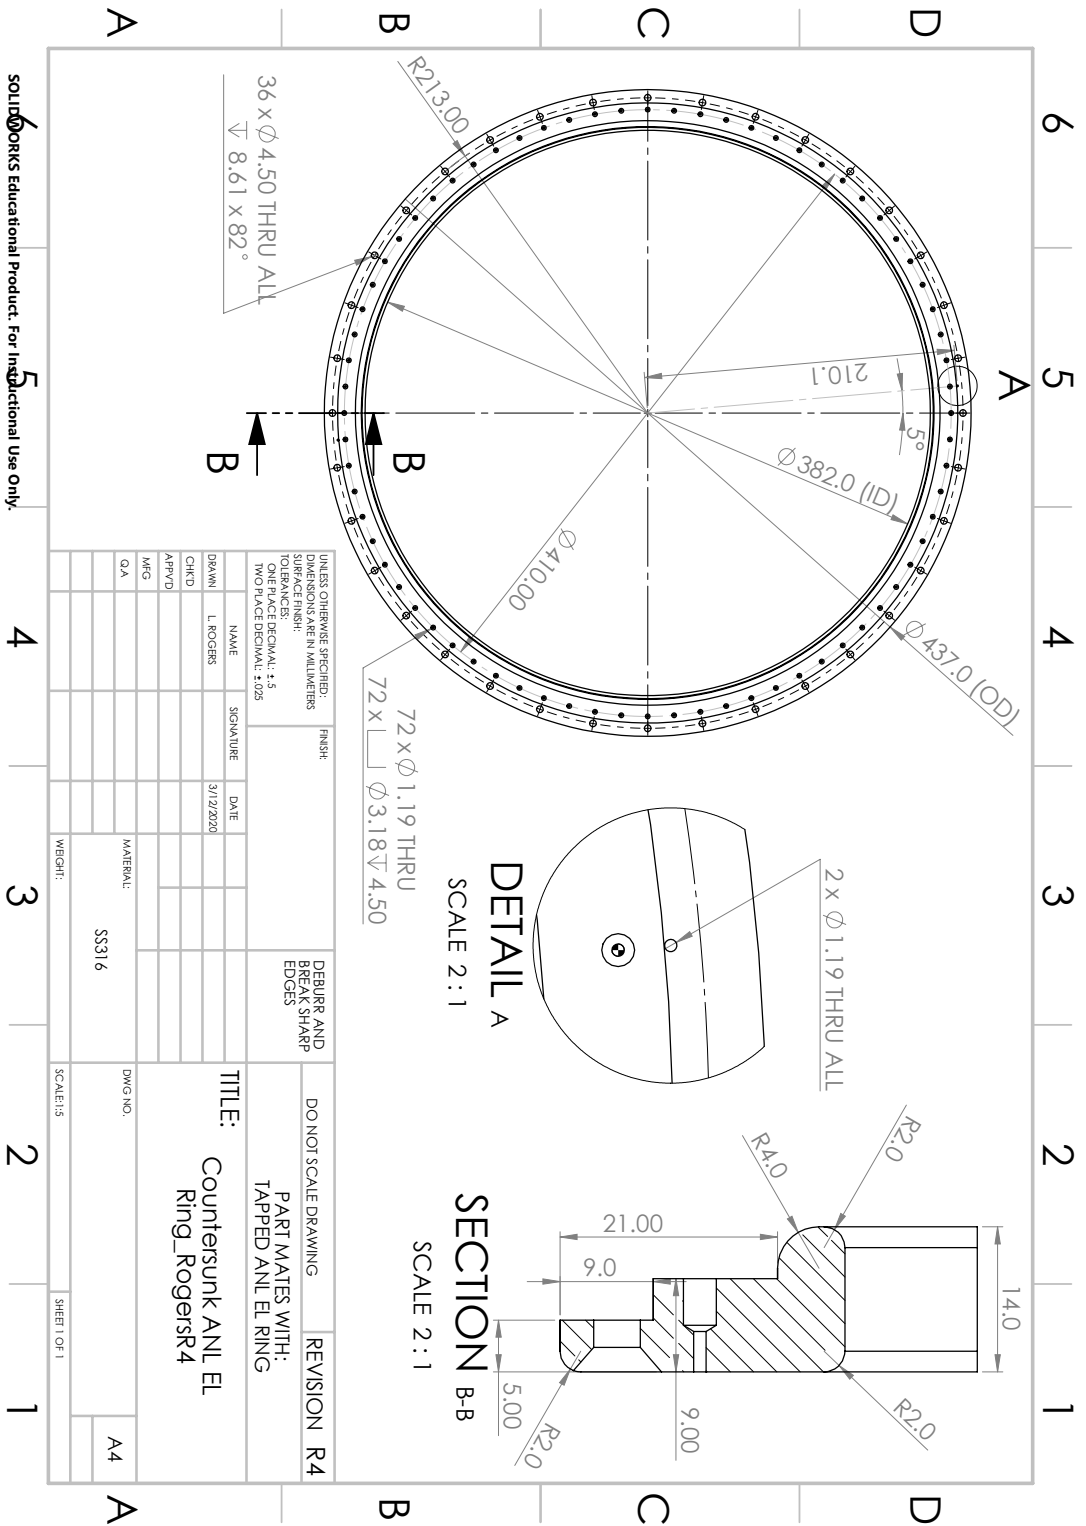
Machine drawings for manufacturing the EL Tension rings.
